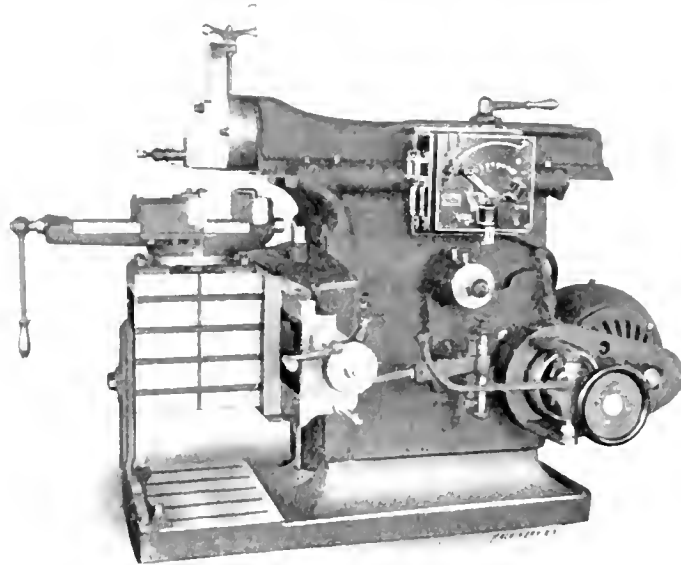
Showing Controller mounted on a Gould & Eberhardt Shaper
